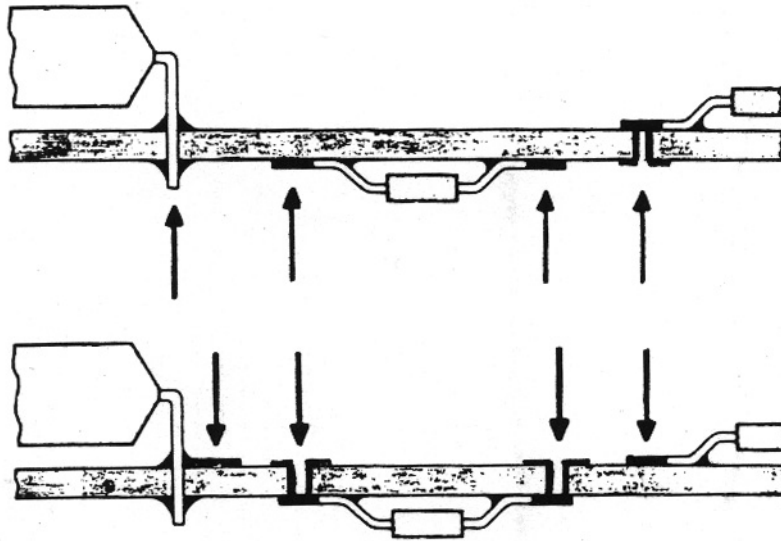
Two methods for single sided test of a board with components on both sides.
